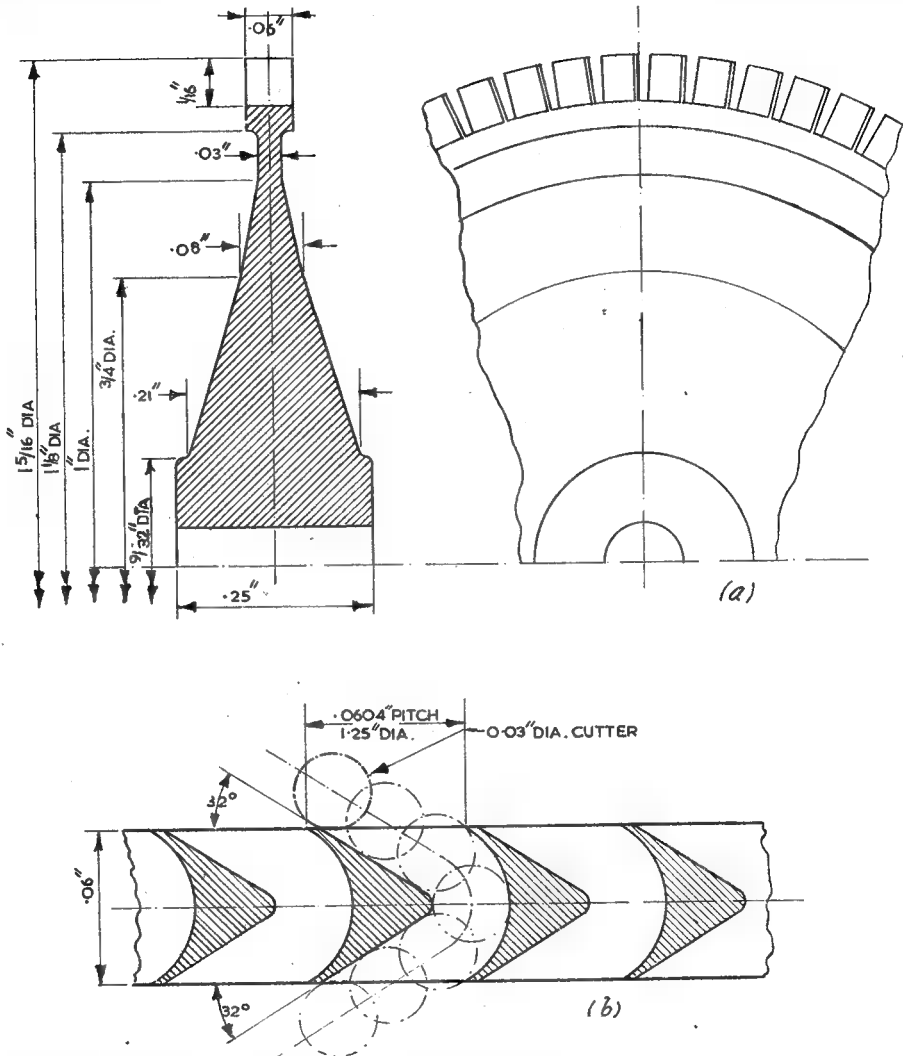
Design of a high-speed impulse turbine wheel. (a) cross section; (b) method of generating blades
